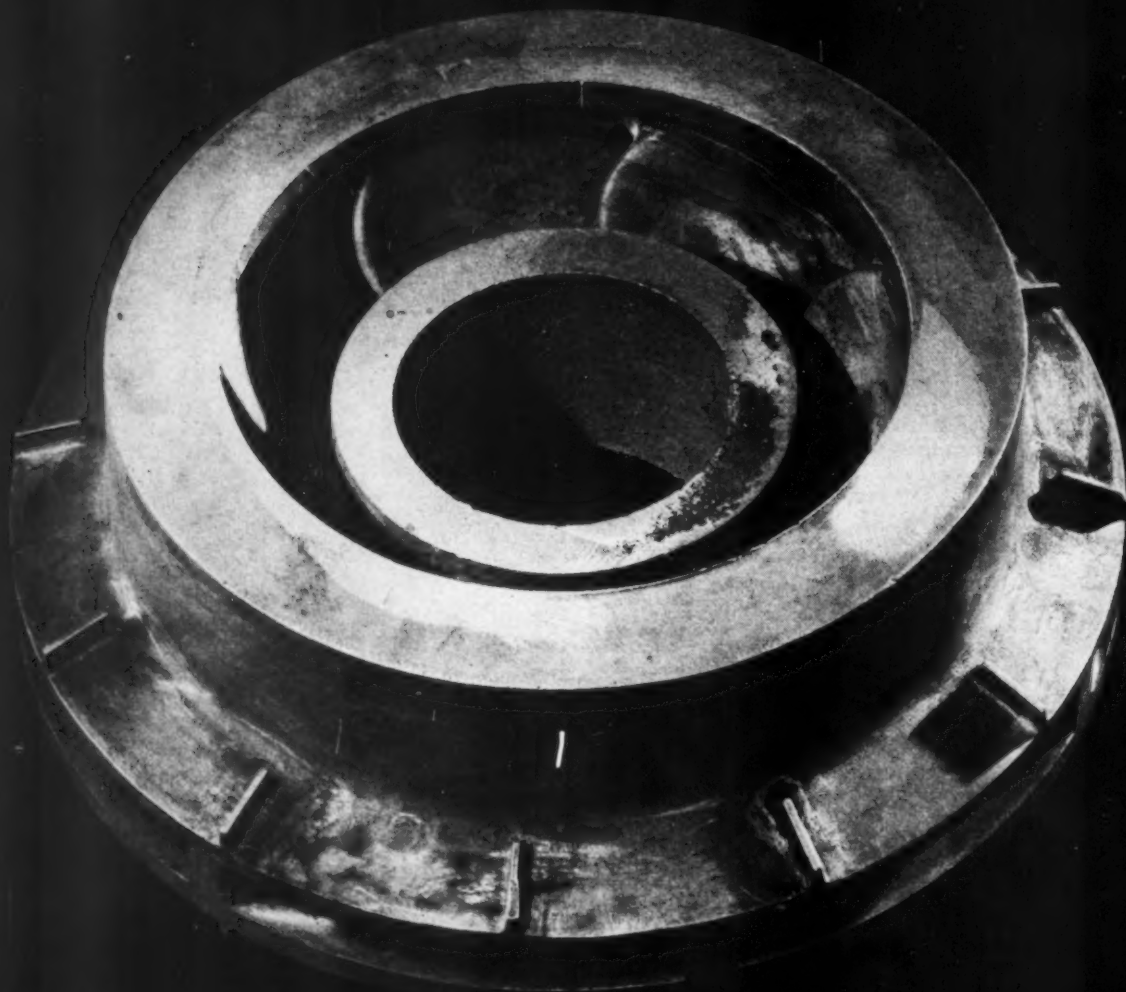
Complex cored aluminum impeller casting produced with shell cores
